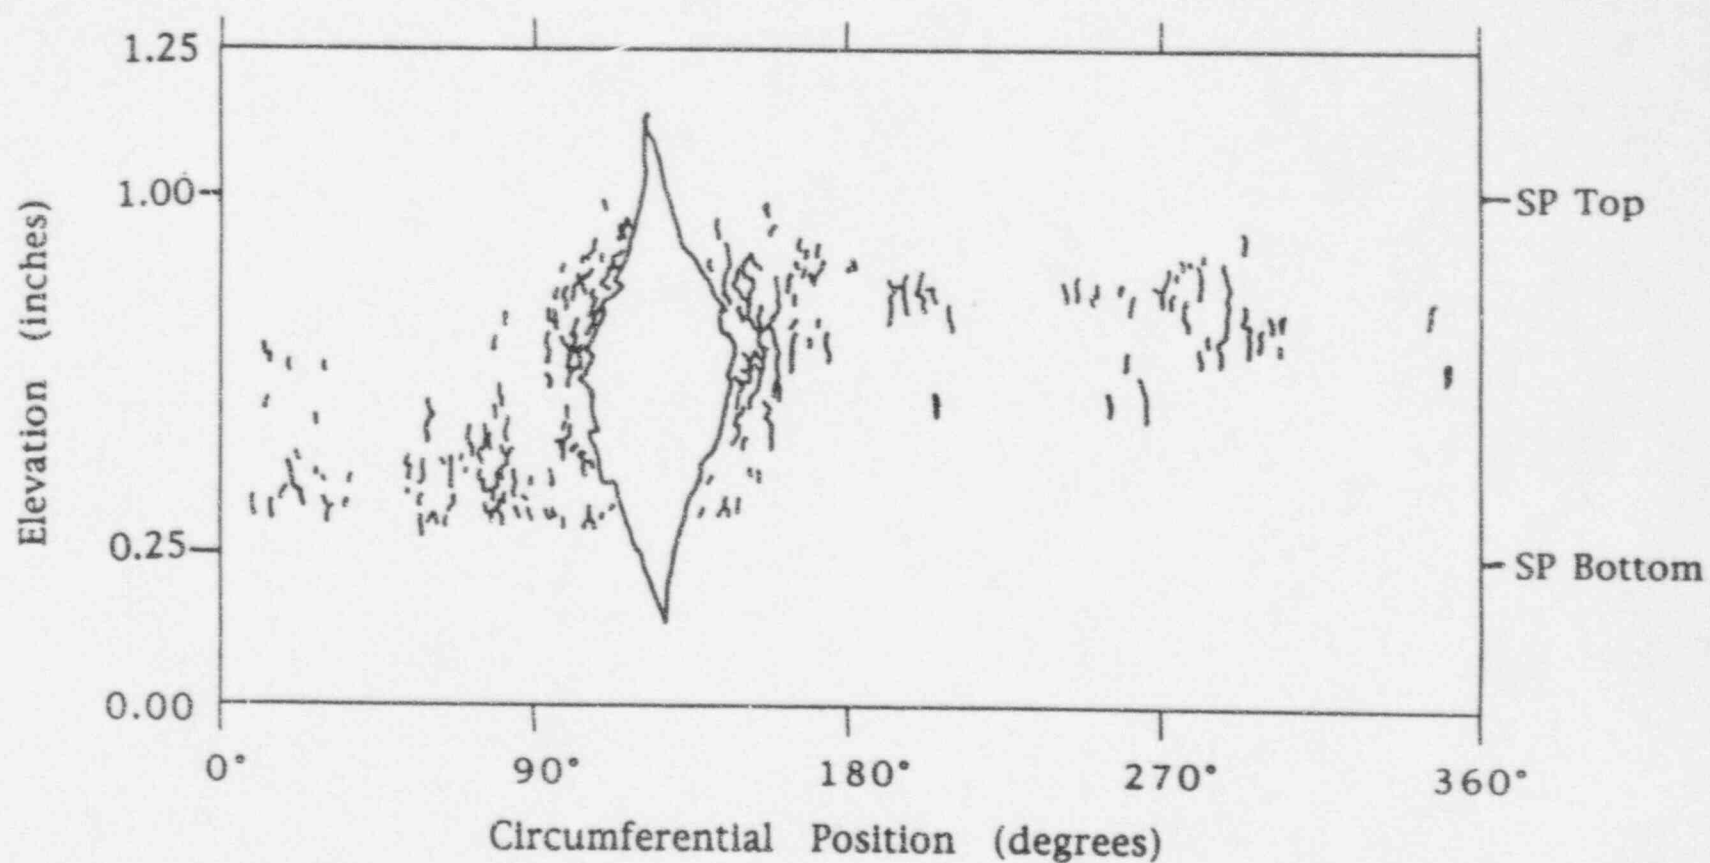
Sketch of the OD surface crack distribution found at the seventh tube support plate (TSP7) region of Tube R3-C107. Also shown is the location of the burst fracture opening. The burst opening extended beyond the TSP crevice region, but the corrosion cracking on the burst fracture was confined to the crevice region.
